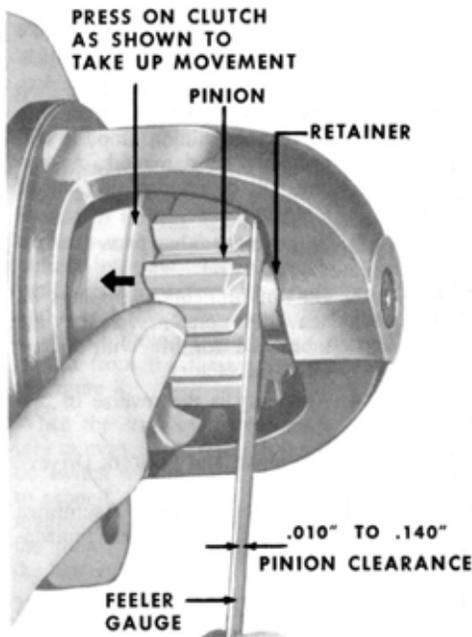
Checking pinion clearance on intermediate duty clutch motor.
